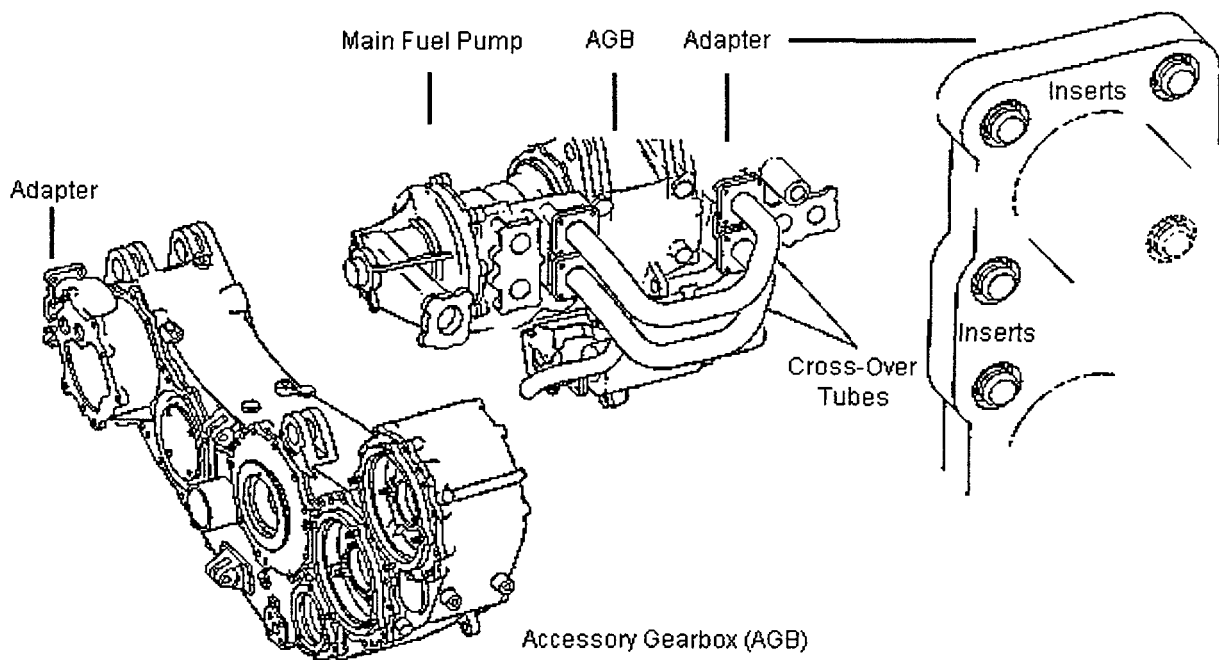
Accessory Gearbox Adapter Configuration and Insert Locations
